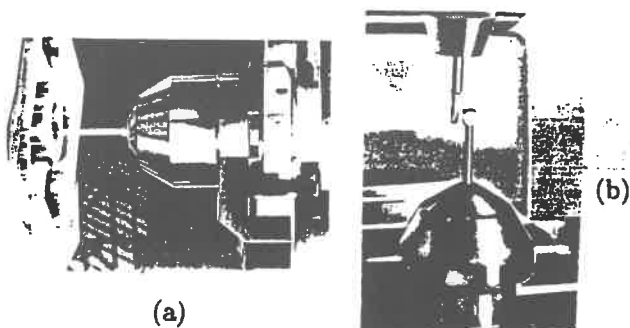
(a) spindle-mounted probe for machining center (b) tool-table mounted probe for drilling and milling
